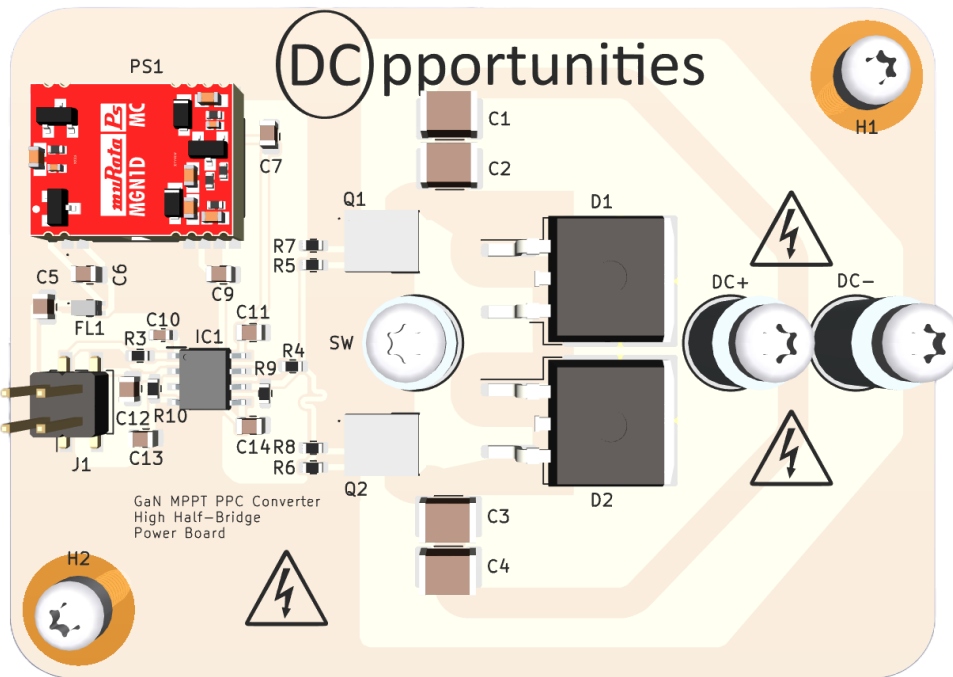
Single-layer aluminium high half-bridge board 3D model designed in KiCad.
